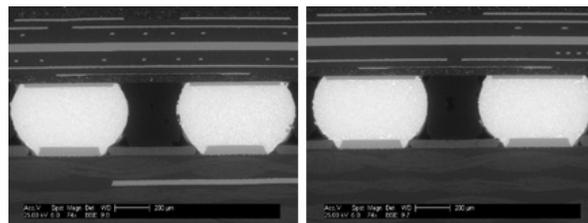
Solder Joints without Fatigue Cracks
